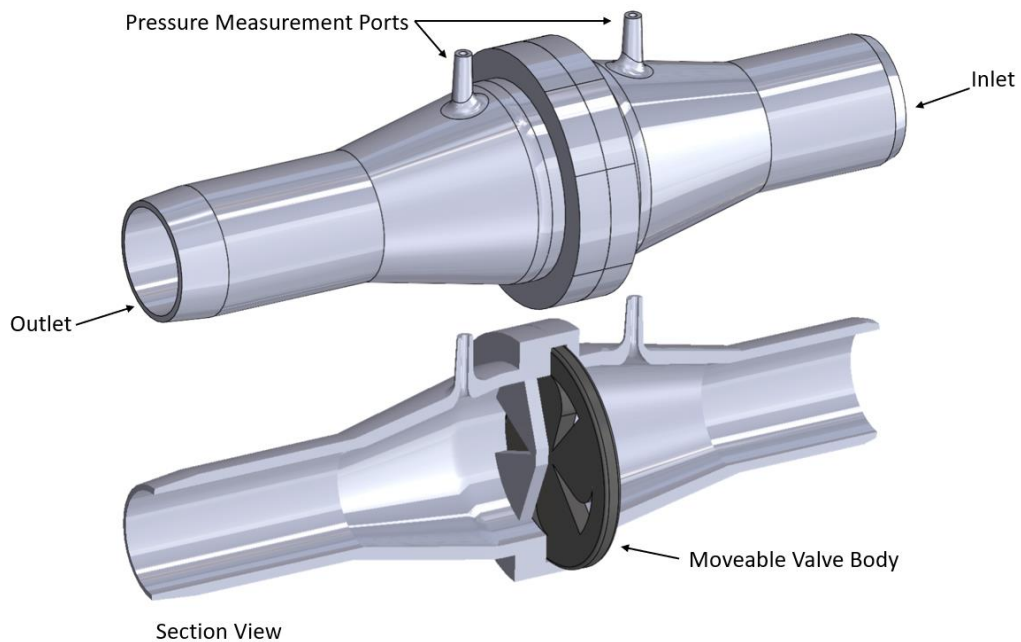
Simplified version of the valve including a section view showing the moveable valve body.
